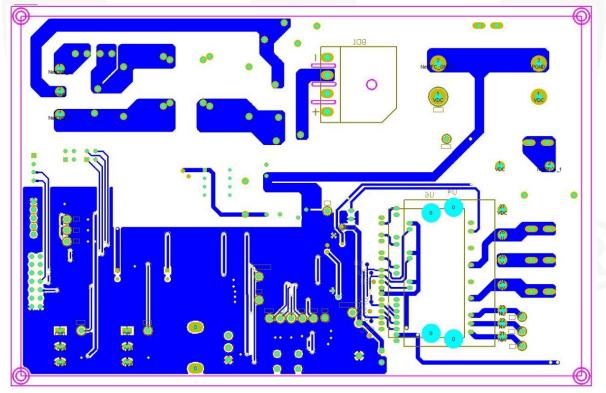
Printed Circuit Board, Bottom Layer, Solder Side
